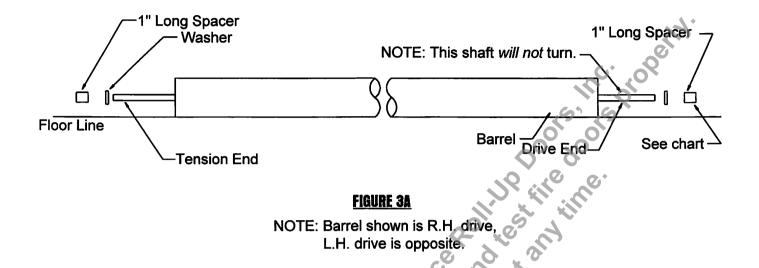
A NOTE: Barrel shown is R.H. drive L.H. drive is opposite.
